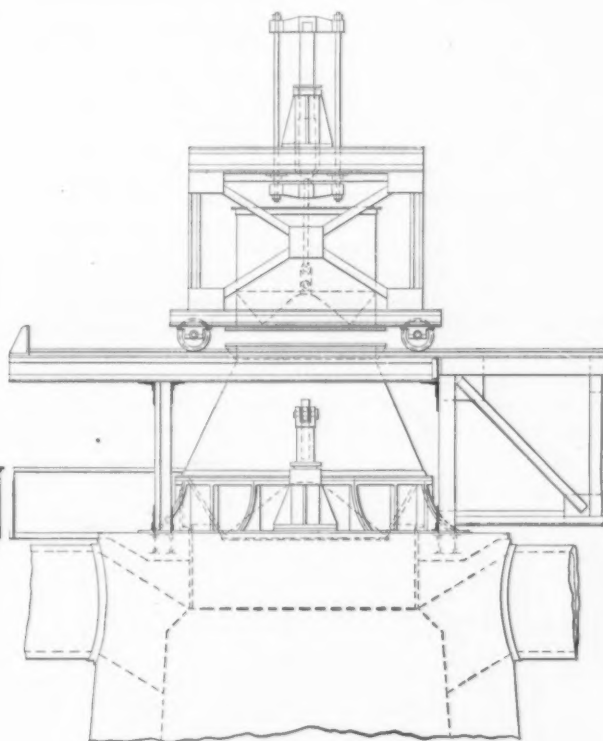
Elevation of Furnace Top with Charging Machine.
